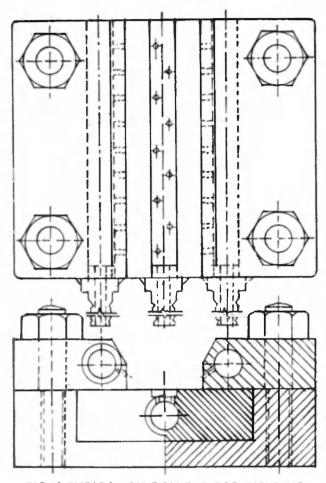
TYPICAL SIDE SHIELD FOR WELDING TITANIUM
